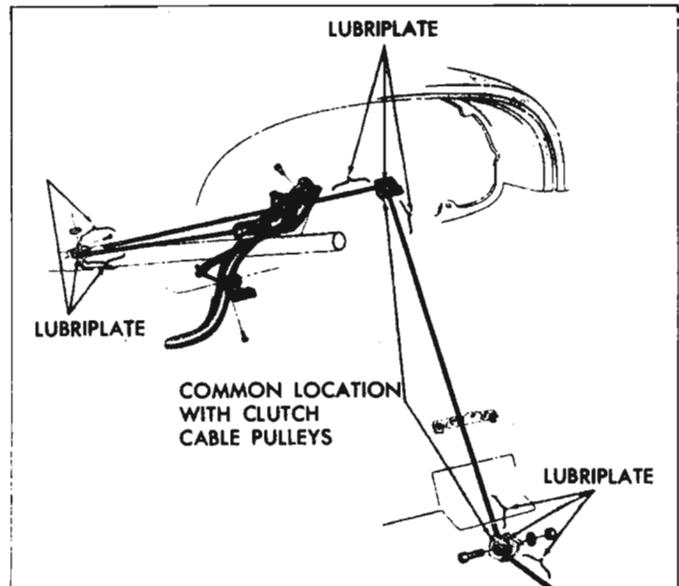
Pulley Lubrication—Parking Brake Cable
